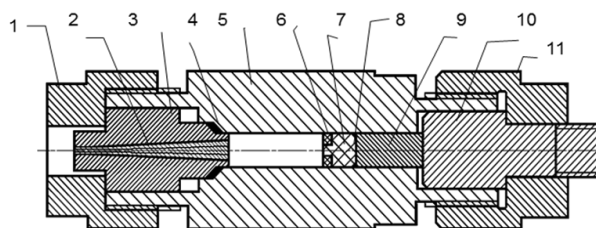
High pressure cell (1- obturator check-nut; 2- electric wires; 3- obturator; 4- obturator seal; 5- double-layered body; 6- rubber ring; 7- ptfs seal; 8- bronze ring; 9- piston; 10- plunger; 11- check nut)
